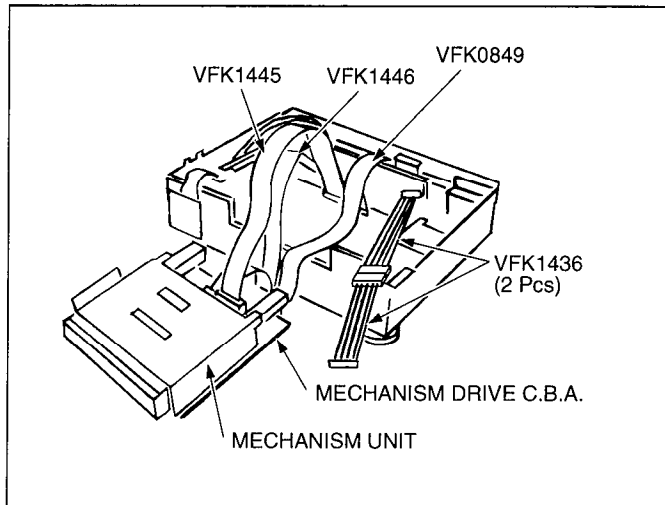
Service Position for Mechanism Drive C.B.A.
